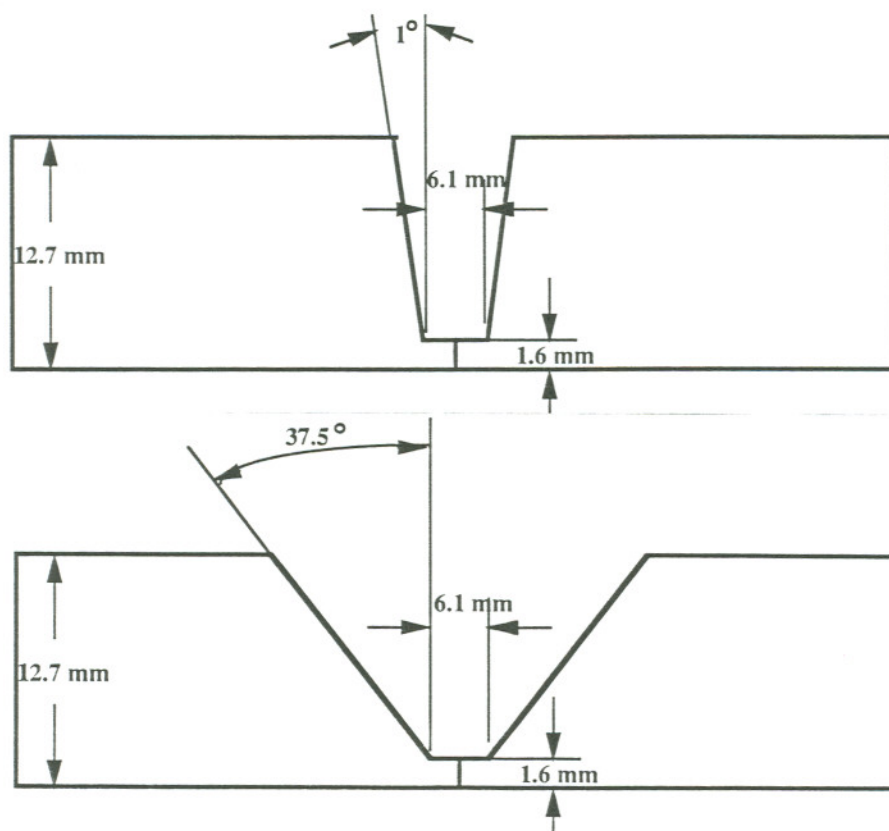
Groove Geometry Designs Used in AMI Weldments
